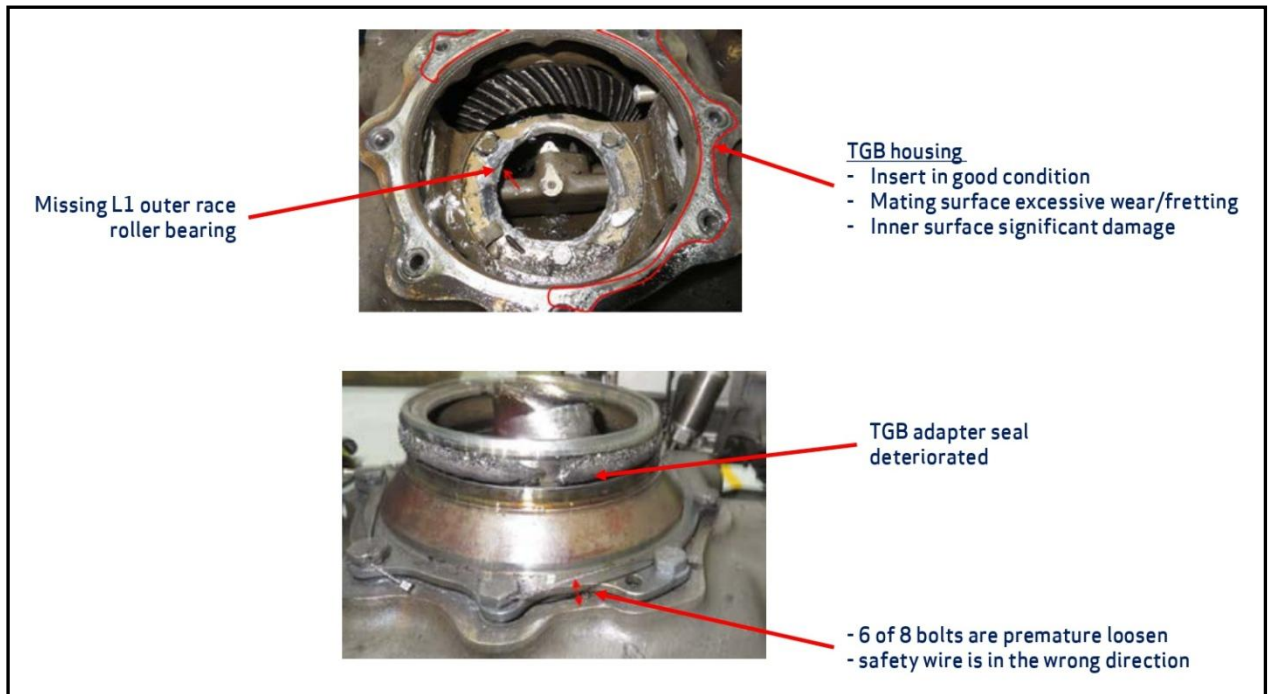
Inspection of TGB housing and adapter seal(Source: M/s CFM)
